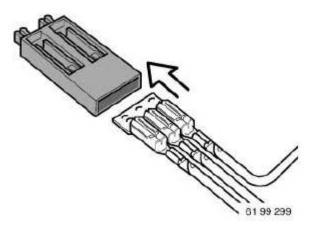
Sliding Fan Connector Into Insulation Housing Courtesy of BMW OF NORTH AMERICA, INC.
